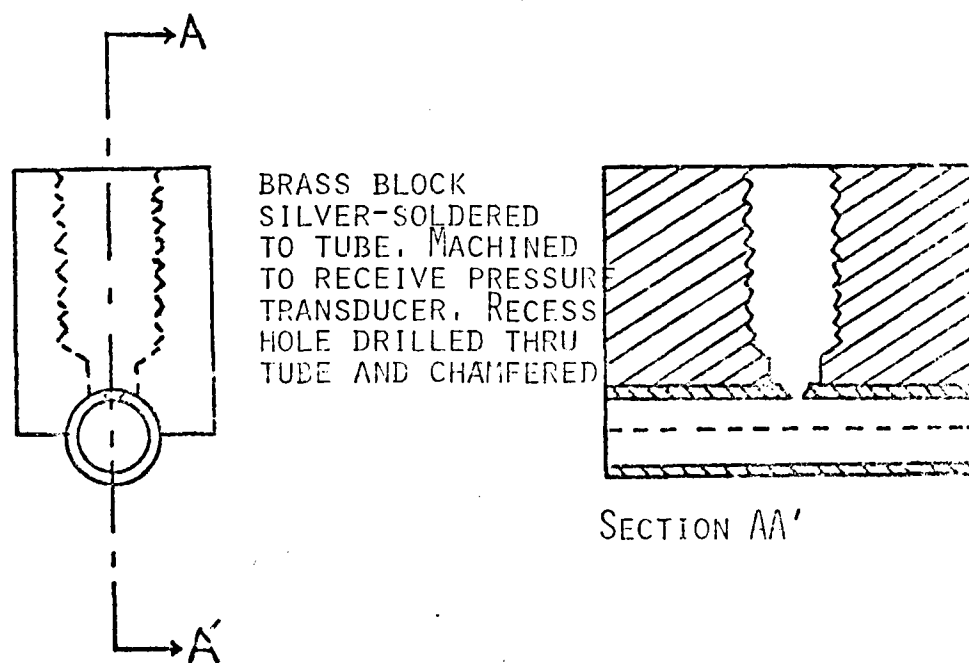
B DETAIL OF RECESS TRANSDUCER MOUNT IN A TUBE GEOMETRY
